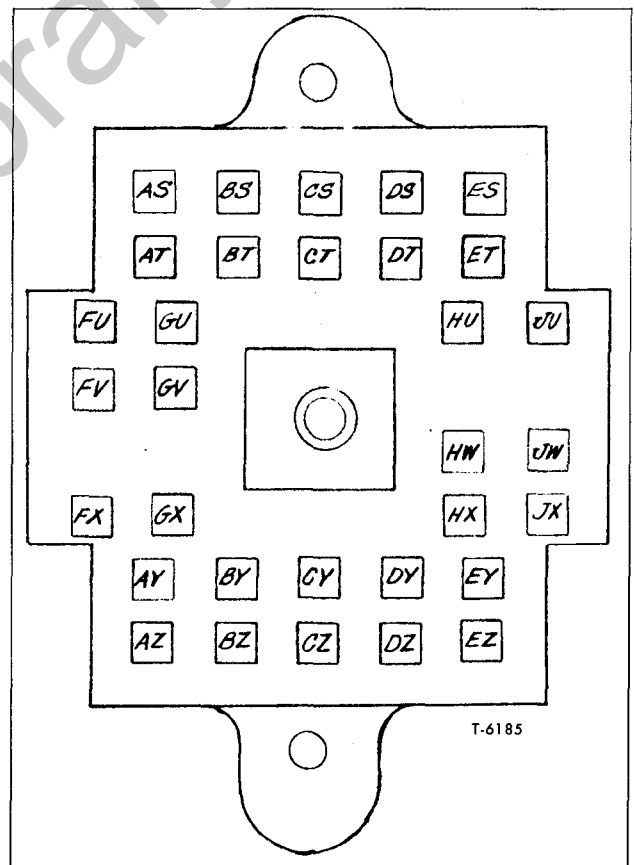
Engine Wiring Harness Connector Terminal Identification (Alum. Tilt Cab Models)
